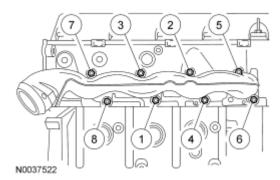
Exhaust Manifold Nuts Tightening Sequence Courtesy of FORD MOTOR CO.
